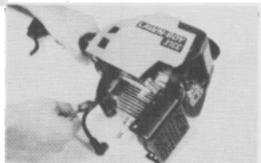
Remove (2) Wire Leads at Ignition Module. Be sure that wire leads are secured in retainer slot before reassembly.
